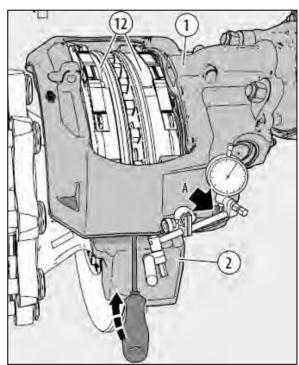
OBTAINING MAXIMUM VALUE OF BEARING CLEARANCE
